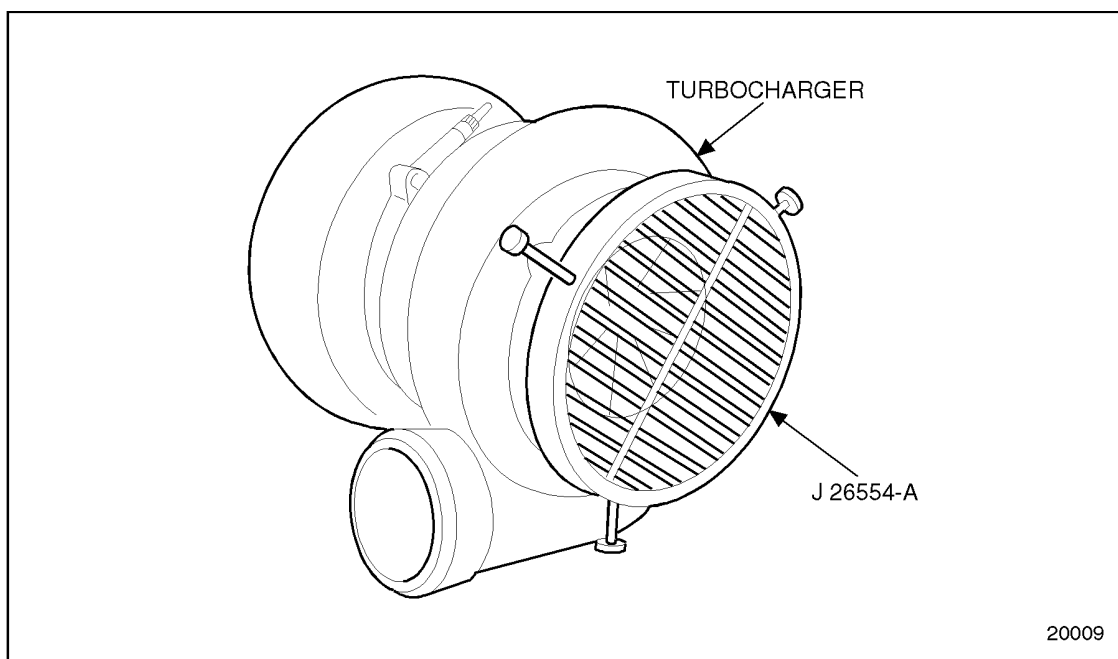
Turbocharger Compressor Inlet Shield, J 26554-A
